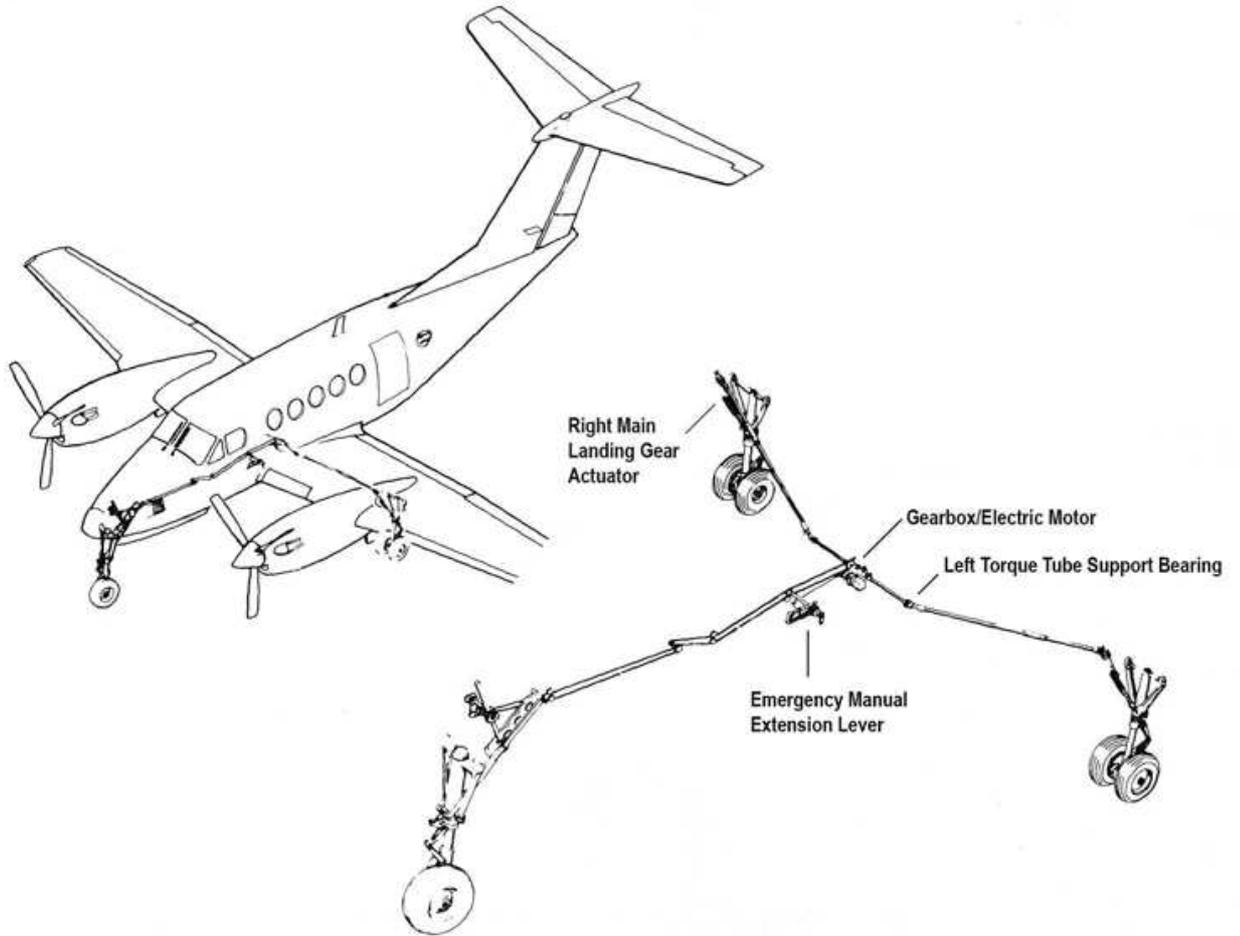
Illustrated part breakdown of the main gear retraction mechanism detailing the torque and gearbox arrangement.
